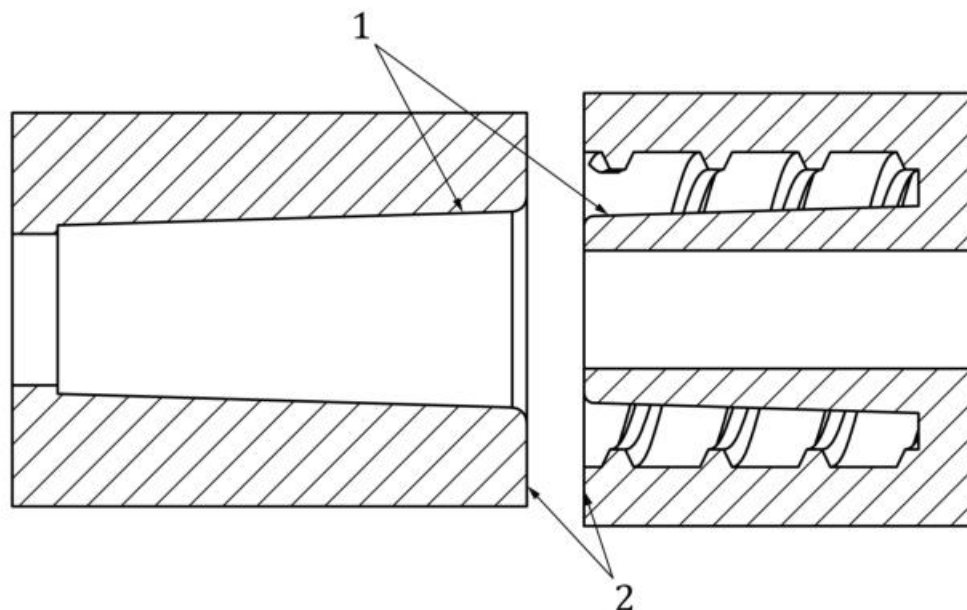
Example of a typical thread-to-thread interface to be evaluated
